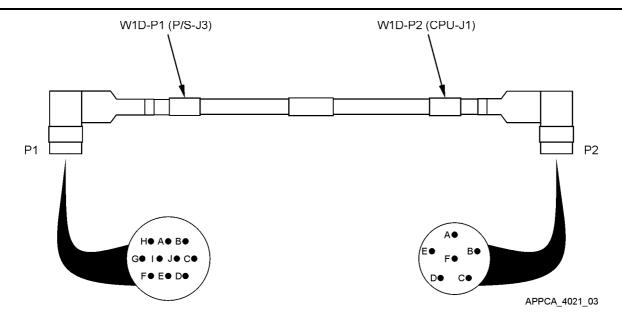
P/N 881321 W1D Cable Assembly (SICPS TENT)
